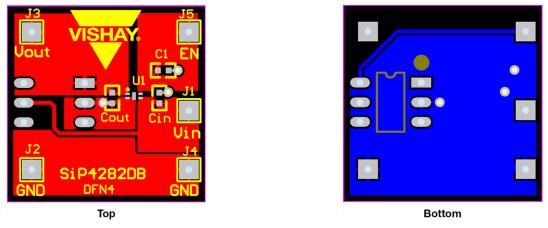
TDFN4 1.2 mm x 1.6 mm PCB Layout
